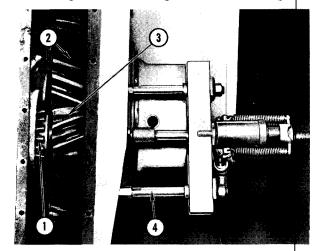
PULLING PINION WITHOUT REMOVING AXLE 1. Inner Bearing Cone 3. Pinion 4. Puller 2. Final Drive Gear
